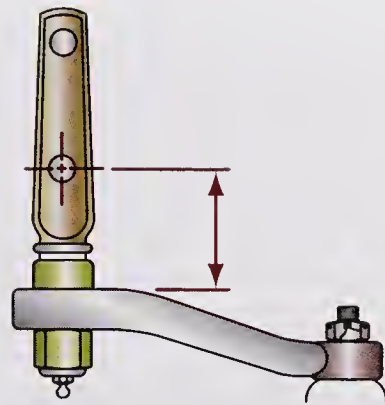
Specified clearance between center of lower bracket bolt hole and upper idler arm surface.
